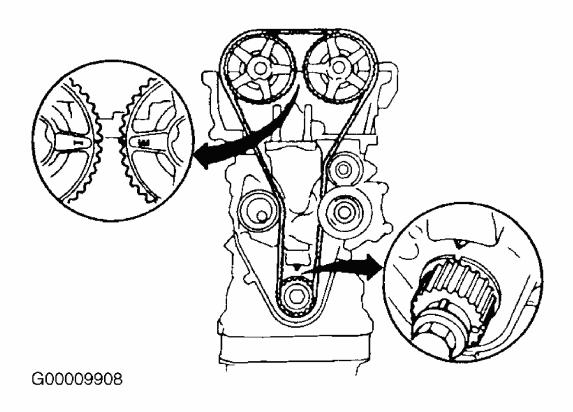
Aligning Timing Belt Sprocket Marks (Protege) Courtesy of MAZDA MOTOR CORP.
